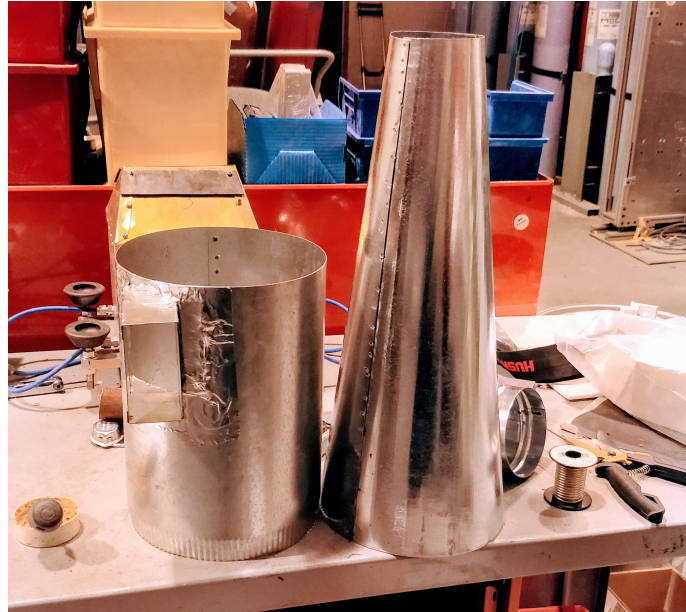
Cyclone Parts Manufactured Out of Sheet Metal
